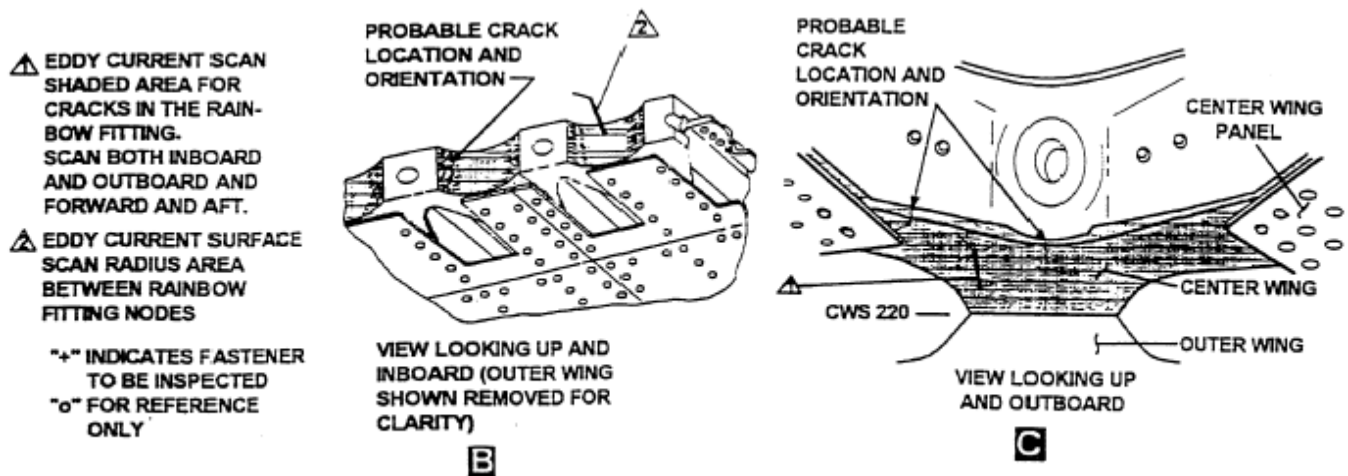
Inspection of Center Wing Lower Surface Rainbow Fitting (Sheet 2)
